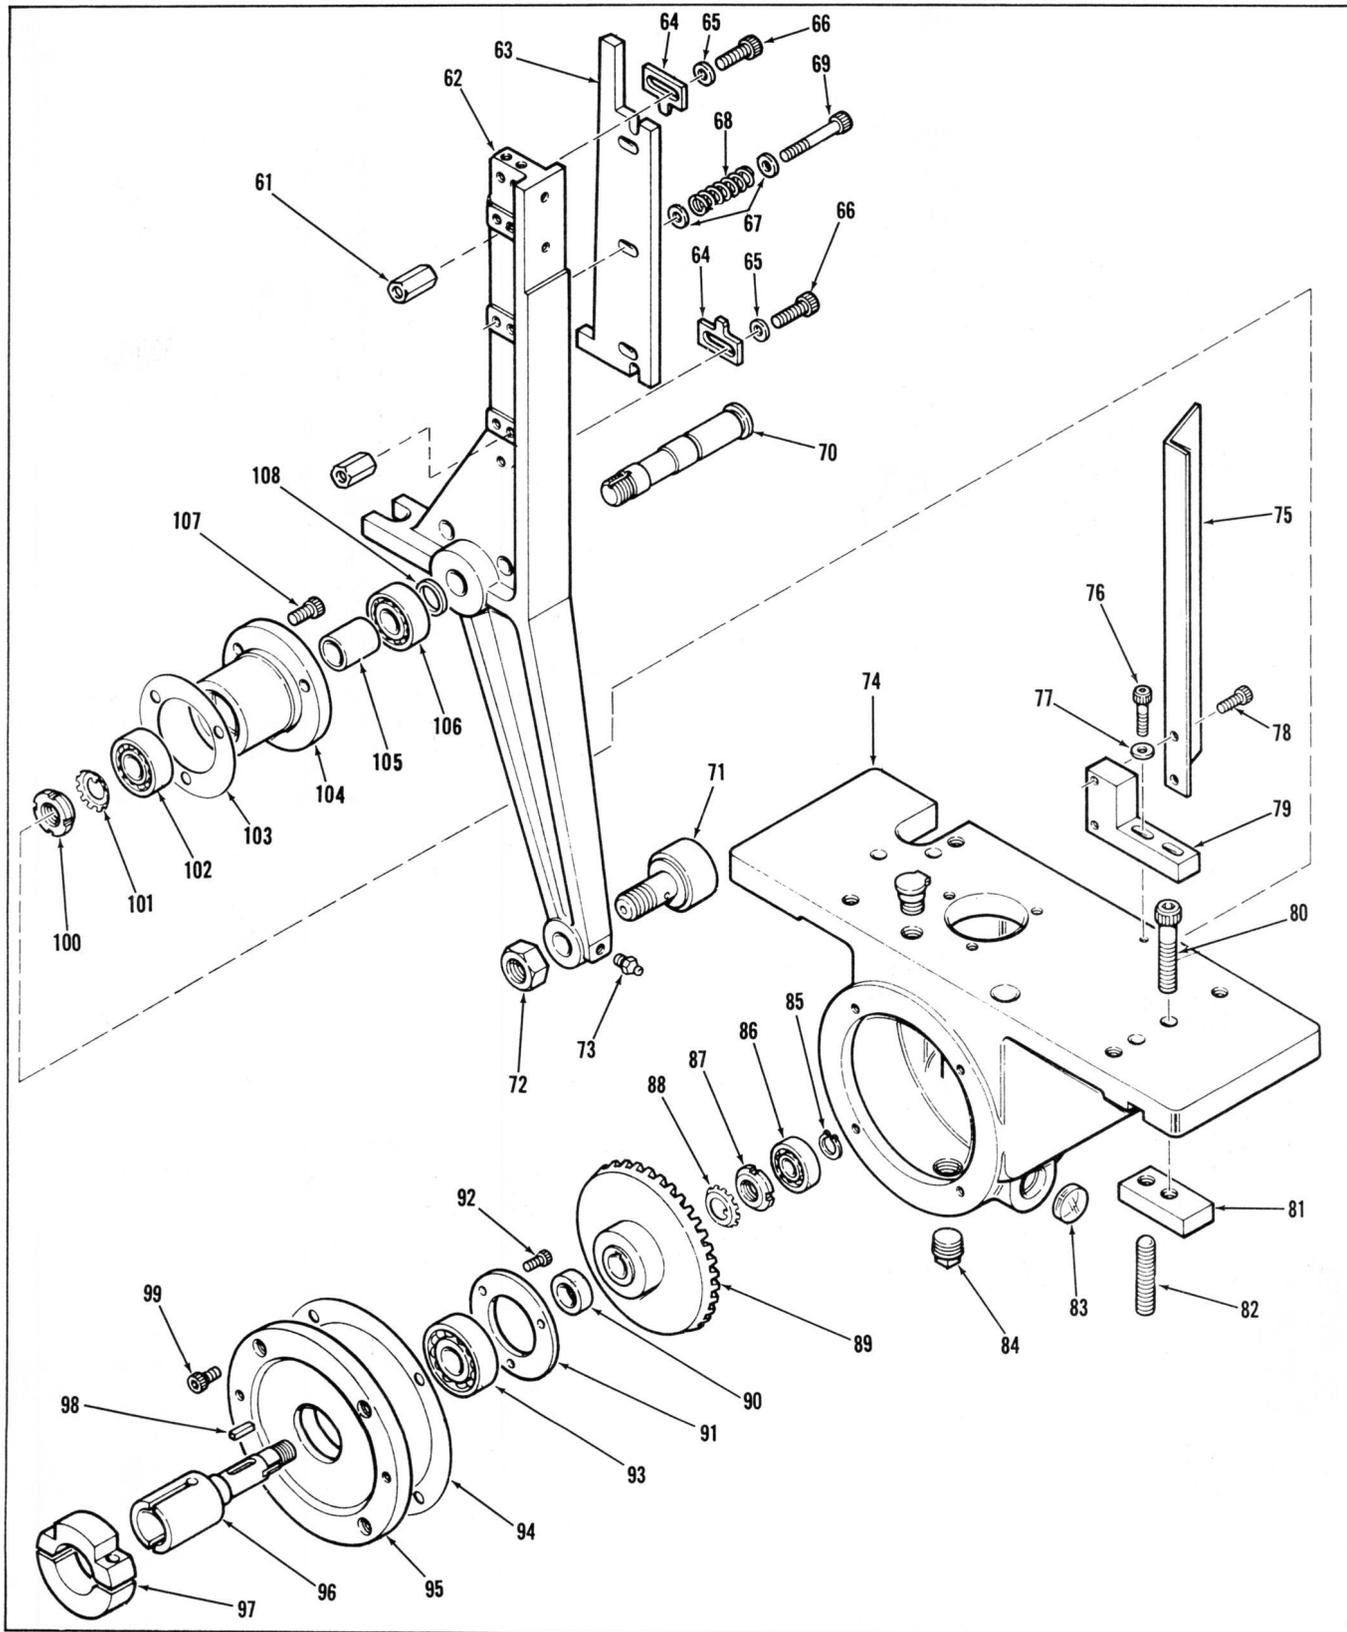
Disassembly of Feed Roll and Cutoff Assembly (Sheet 2 of 2)
